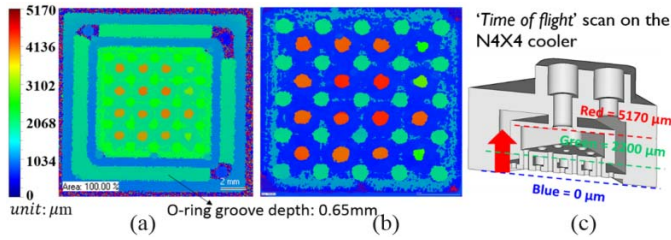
SAM measurement for assessing the depth of the printed nozzles. (a) SAM image with focused depth on cooler bottom layer and (b) nozzle plate layer. (c) Indication of the depth of different layers.
